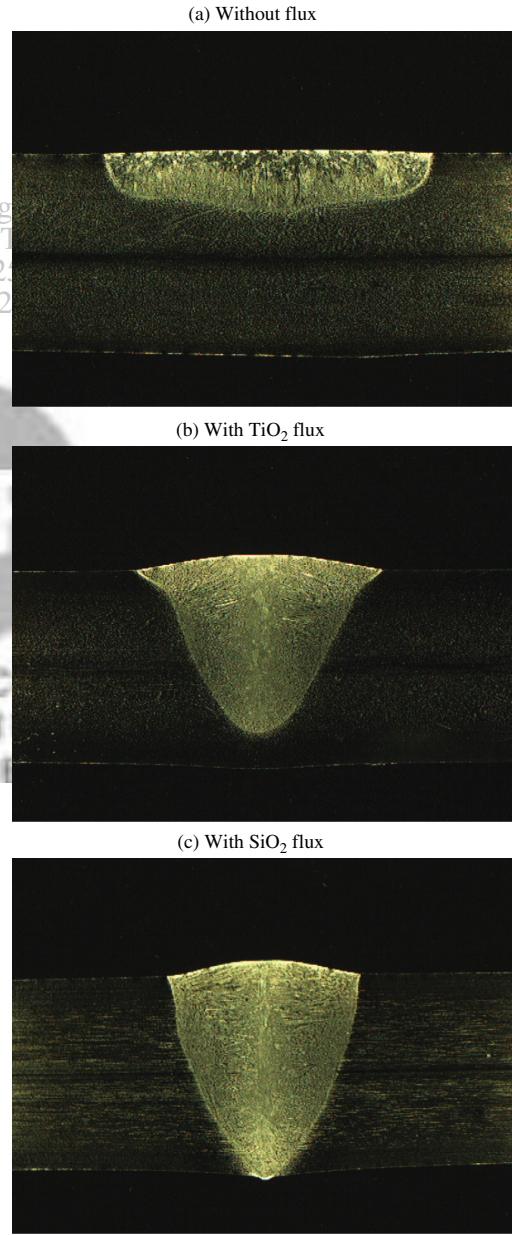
Cross-sectional macrograph of TIG welds produced with and without flux.
